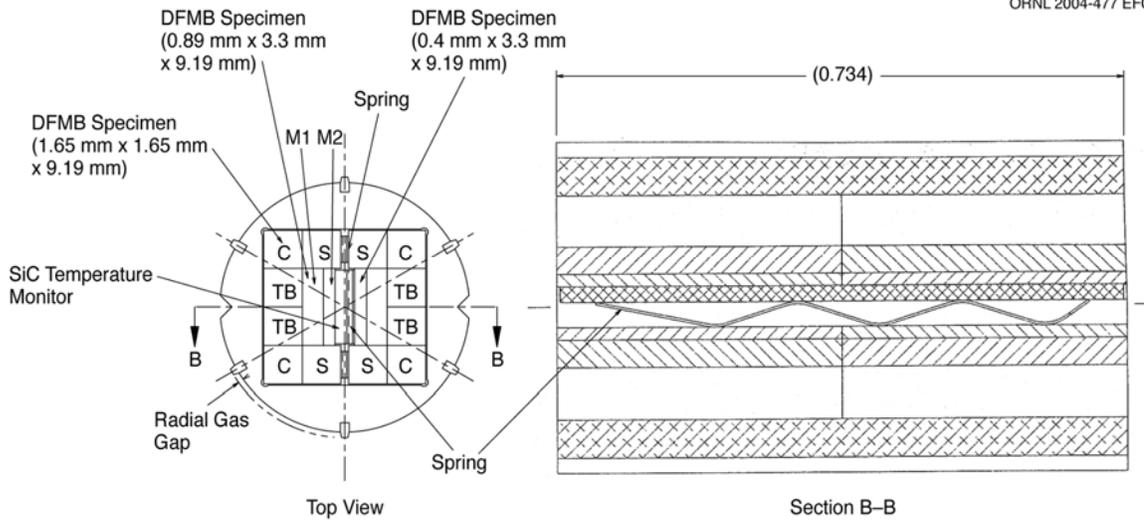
Specimen holder subassembly used in JP-27 for DFMB specimens.
